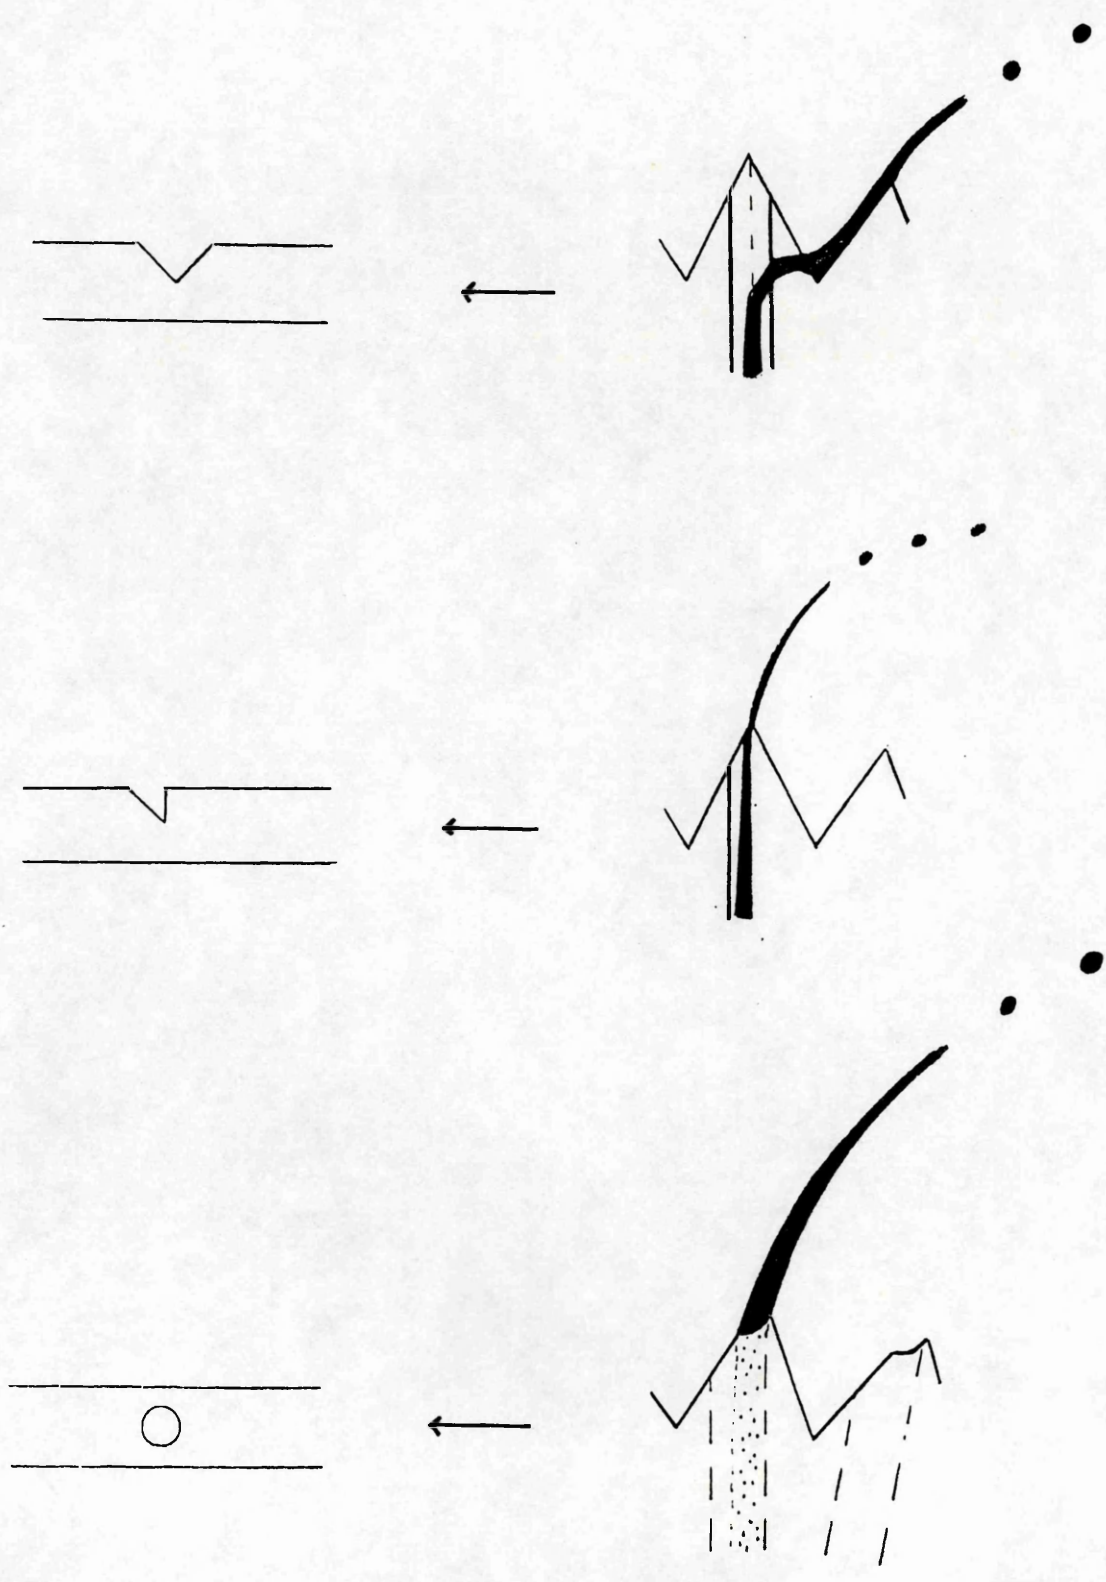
Three designs of tooth tested with Waterwheel Mk.6
